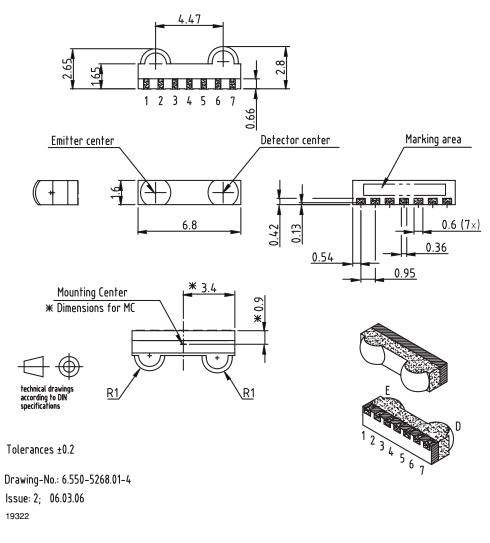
TFBS4650 Mechanical Dimensions, Tolerance  $\pm$  0.2 mm, if not otherwise mentioned
